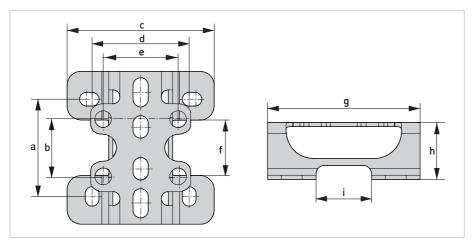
Mounting bracket for pipe and wall mounting 2" / 50.8 mm
